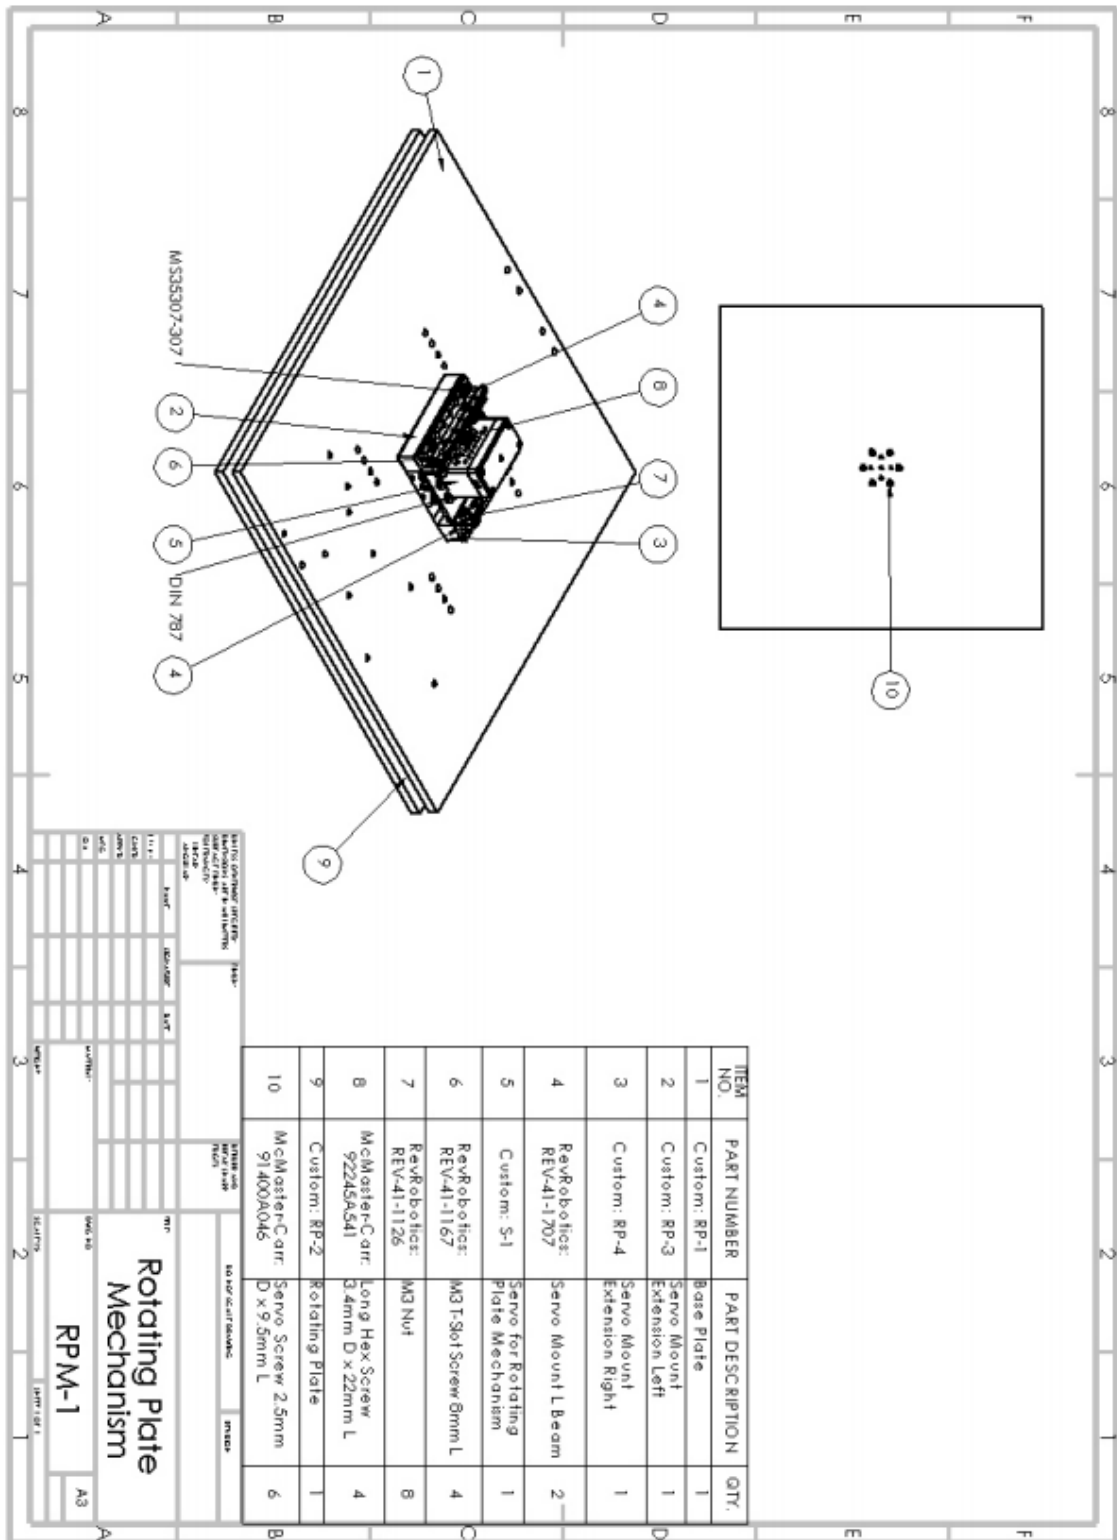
Assembly drawing of the rotating plate mechanism.
